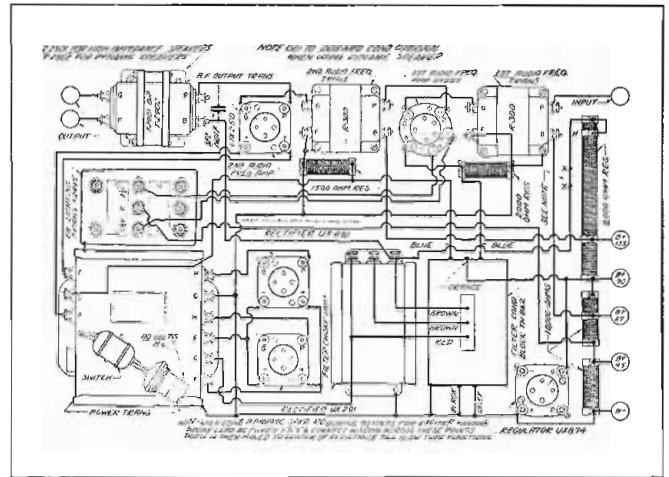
This drawing is only a graphic one insofar as the placement of parts is concerned and is intended as a guide for the individual who is not skilled in radio assembly. The job should be laid out in accordance with the photograph in Figure 1 and then wired in accordance with the above graphic
